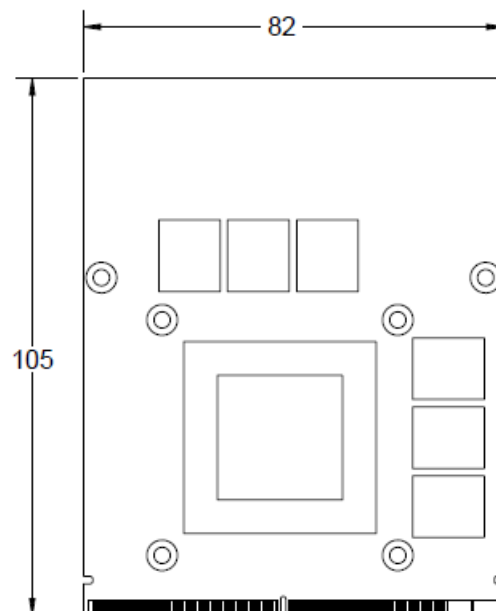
EGX-MXM-AD3500 mechanical dimensions
